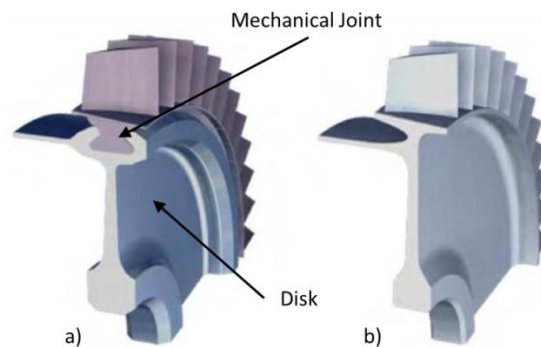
a) Blade-disk with mechanical joint and b) linear friction welded blisk¹
